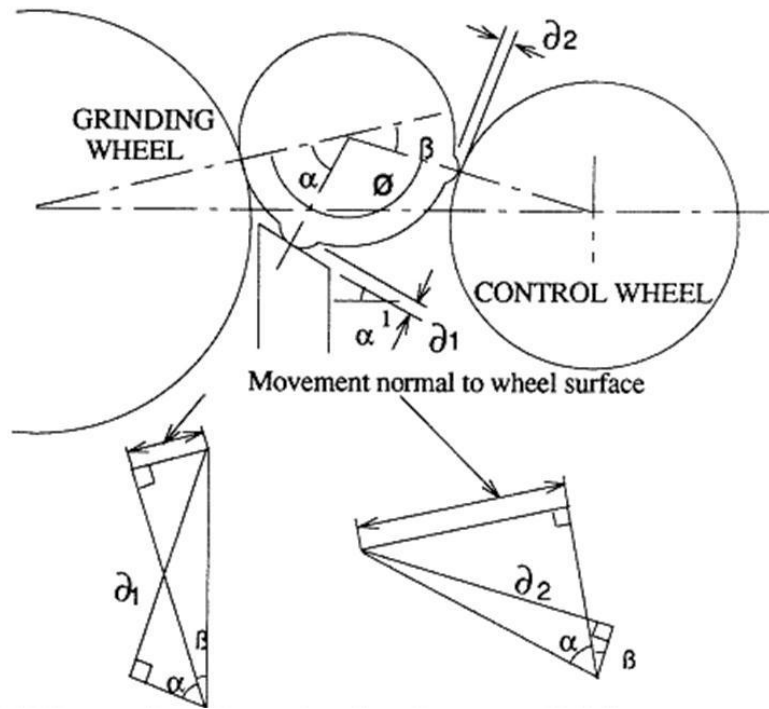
Transferring of imperfections in contacting points with blade and control wheel to the grinding point [Rowe, 1989]
